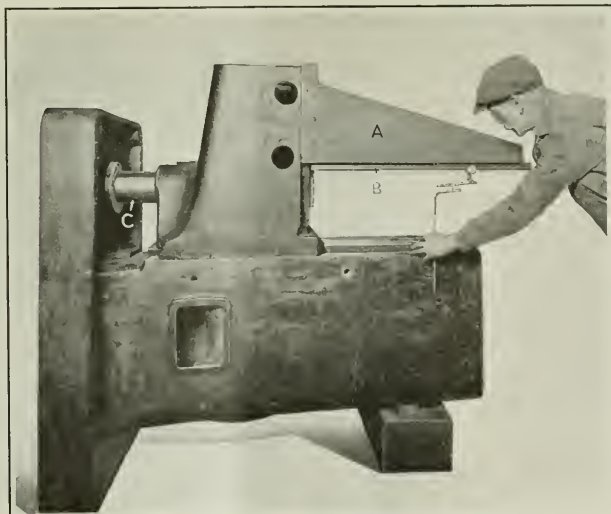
Fixture for inspecting Assembled Column and Knee
